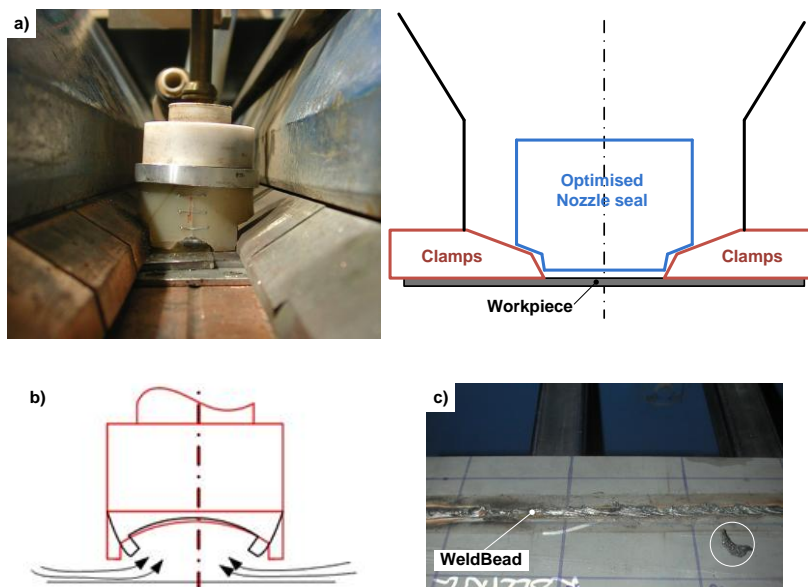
Issues with the silicon seal of the cryogenic nozzle. a) Arrangement of the profiled silicon seal in the seamer b) schematics of bending seal due to the low stiffness of the profiled shape c) a piece of weld pool that had been ‘sucked-up’ due to initial cut outs on seal
